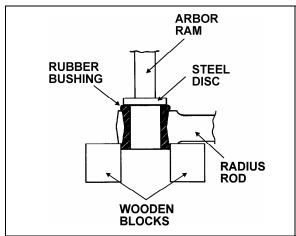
RADIUS ROD BUSHING REMOVAL
